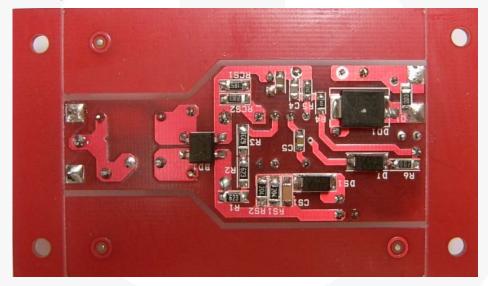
Bottom View Dimensions: 59mm (L) ×25.5mm (W) × 20.0mm (H)
